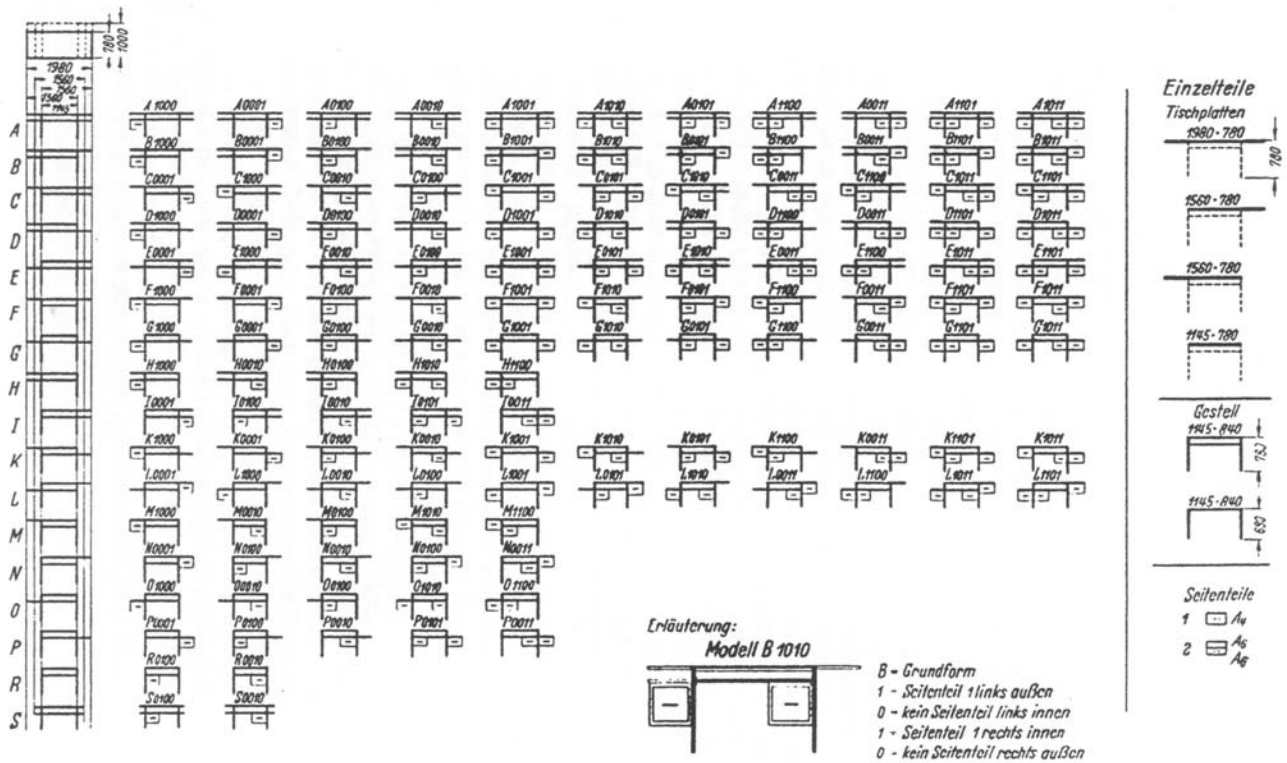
Detail from the structural plan of a closed system: Mauser-Werke drawing desk
